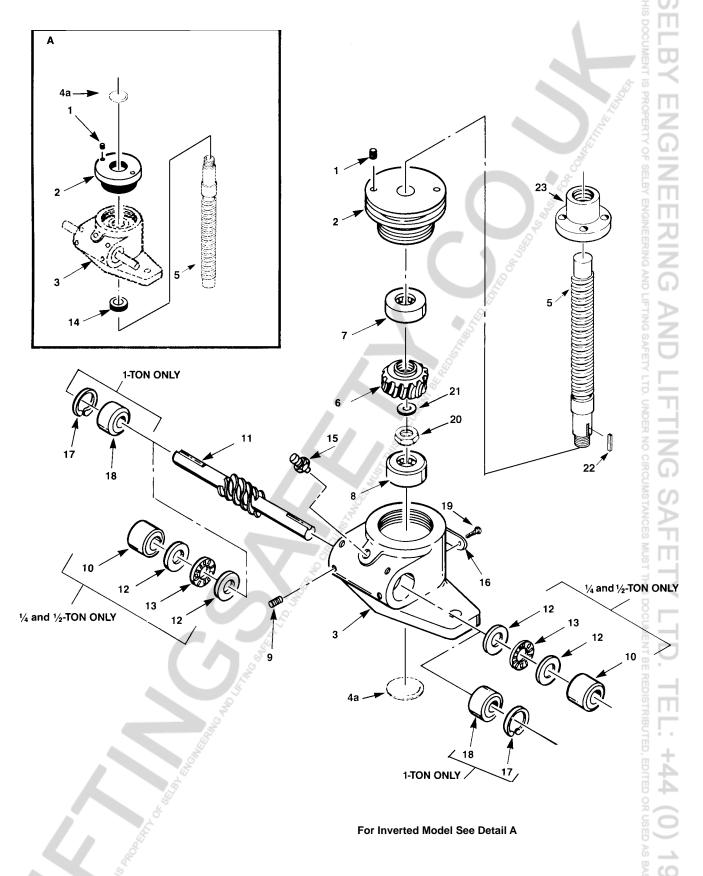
Exploded Illustration 1/4, 1/2 and 1-Ton Rotating Machine Screw Actuators
